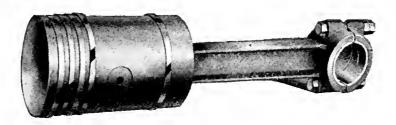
Piston and Connecting Rod Assembly of Secor Motor.
